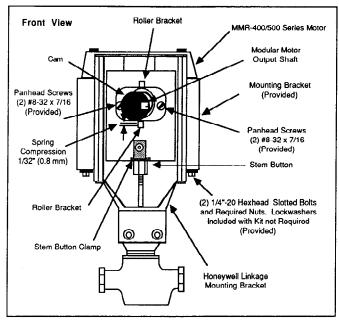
Honeywell Q618A Valve Linkage (Shown with Cover Removed)
